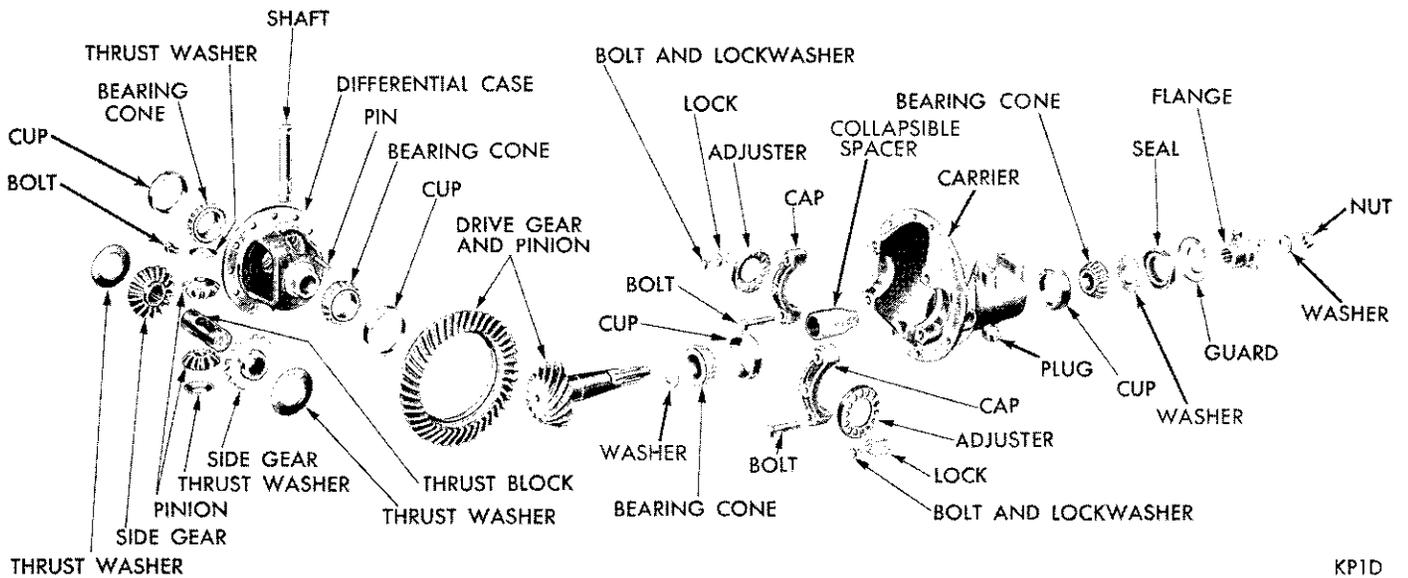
Differential Carrier Assembly (Large Stem Tapered Pinion)
